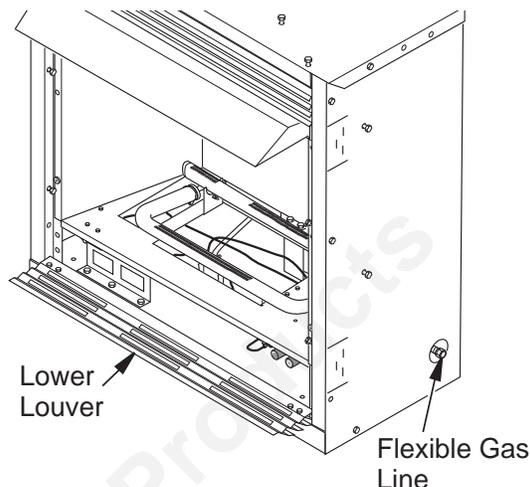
Flexible Gas Line Location (Remote-Ready Unit Shown)
